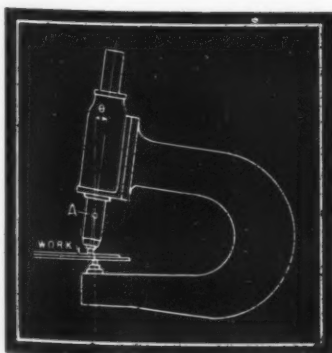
Cumulative deflections of straight sections, quarter bends and cantilevers may result in faulty operation of a machine
